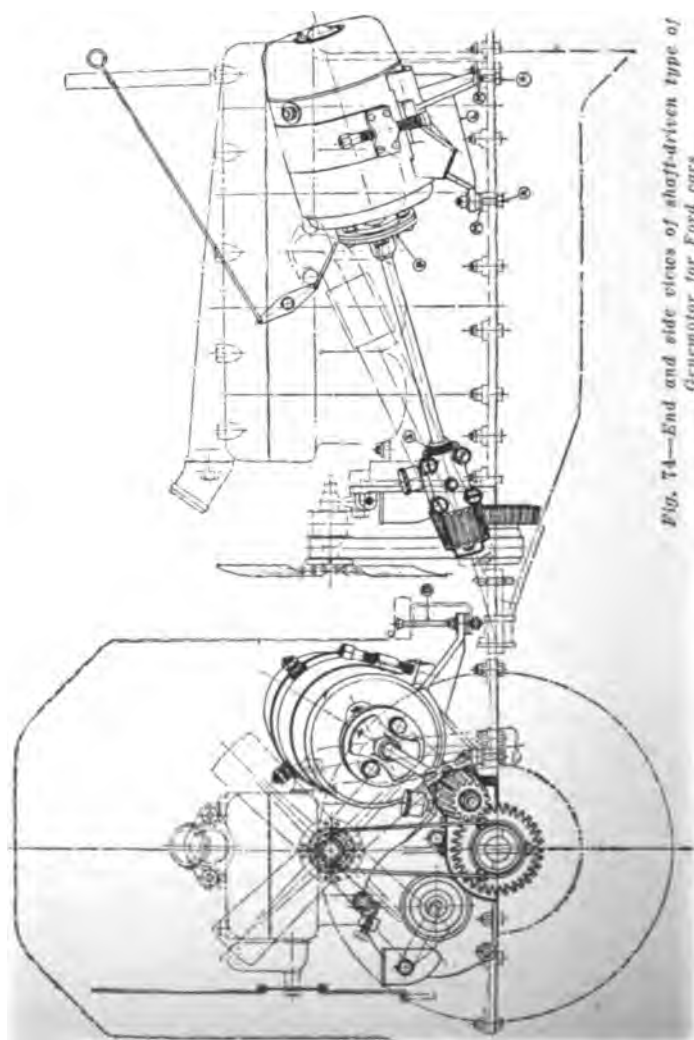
End and side views of shaft-driven type of Generator for Ford cars
